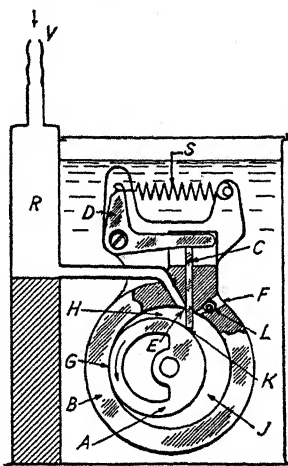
Oil Sealed Vacuum Pump (Cross-section)
